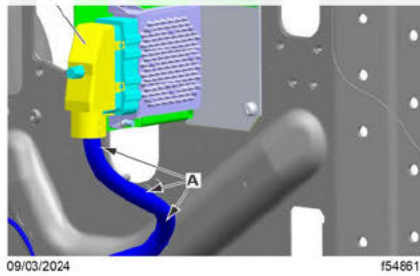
, End Cap Installed on Engine Harness Overlay Connector Labeled 'ALLISON TCU'
